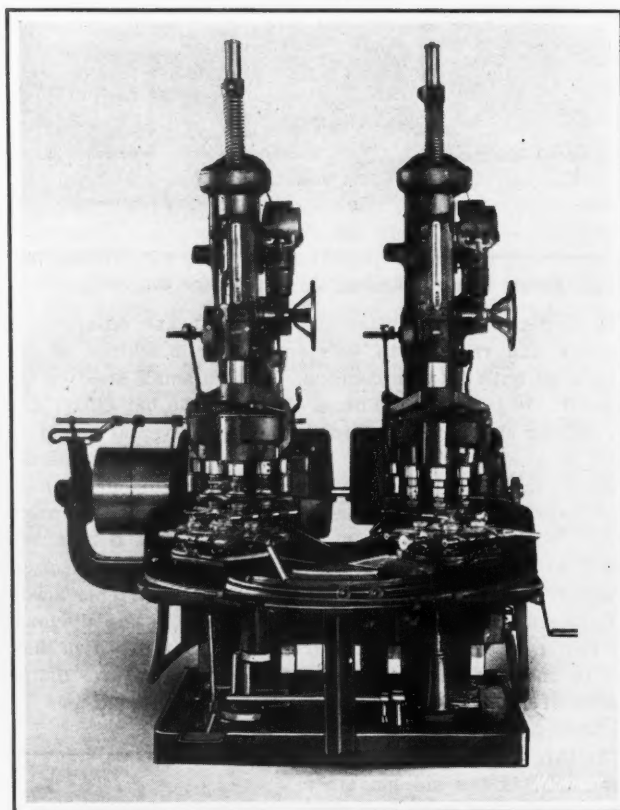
Automatic Two-spindle Machine equipped with Auxiliary Heads and Four-station Tables
